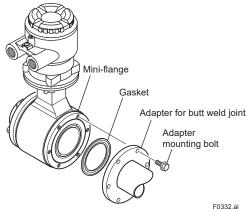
Mounting Procedure for Butt Weld Joint Type
